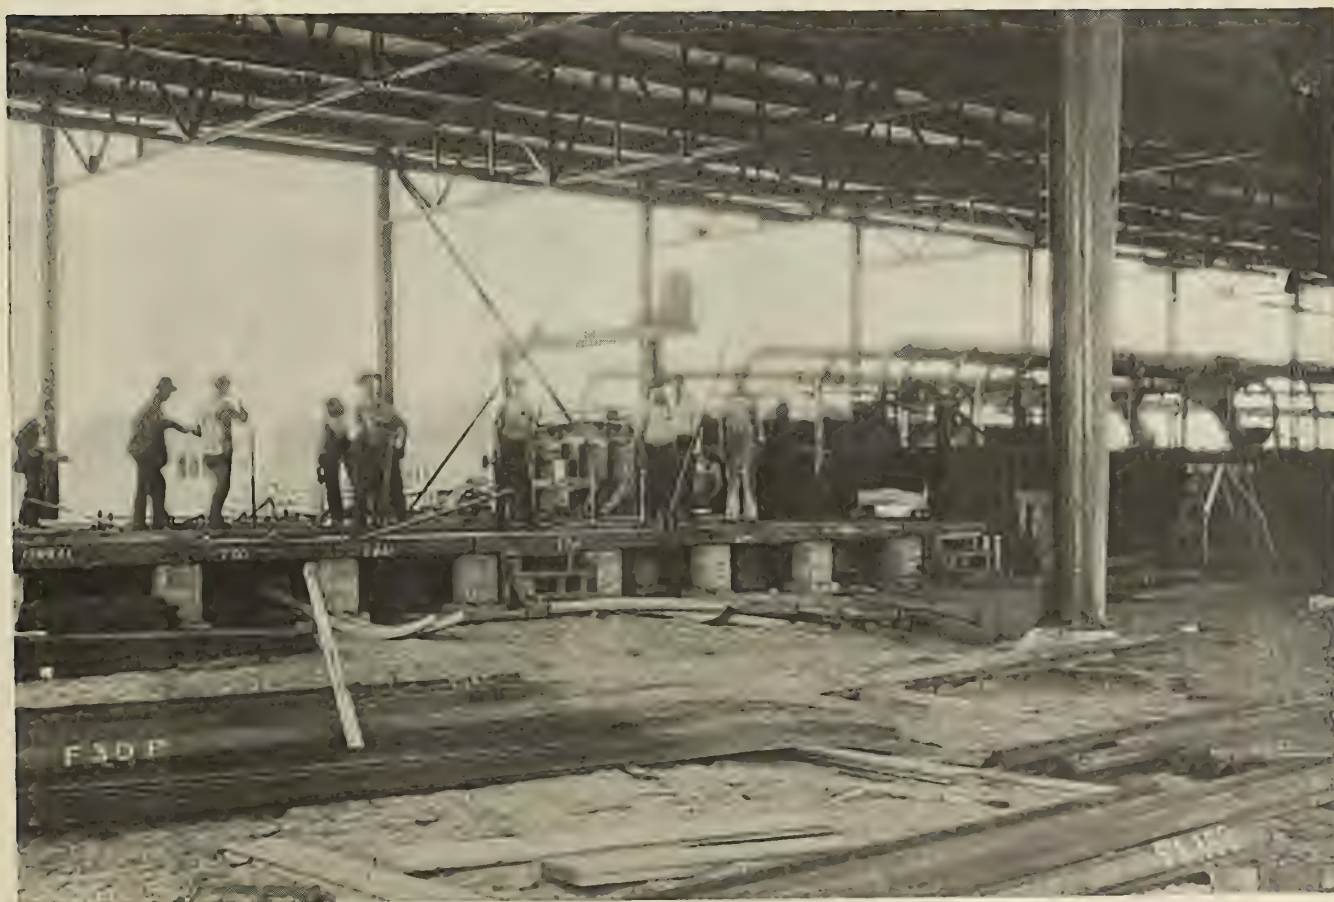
Fabricating Shop and Bending Floor, Looking Southwest
